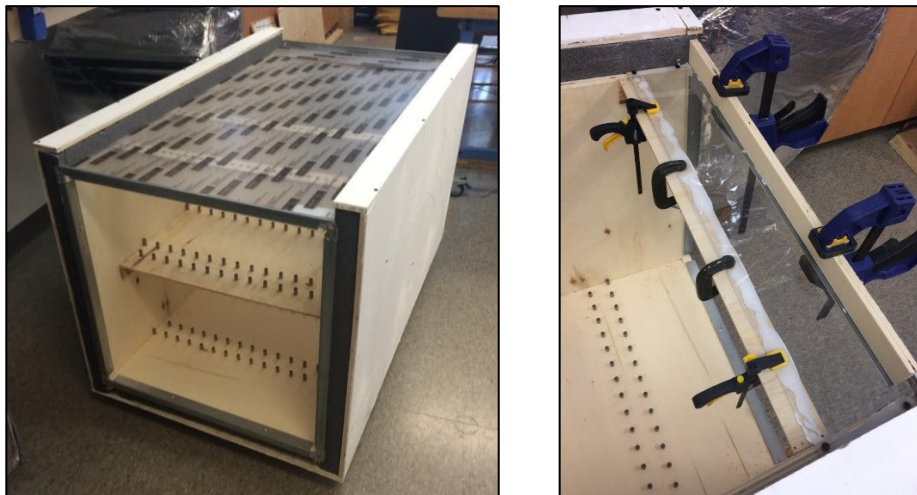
Left) Completed Box Sides with Plexiglass and Right) Small Section of Plexiglass Installation
